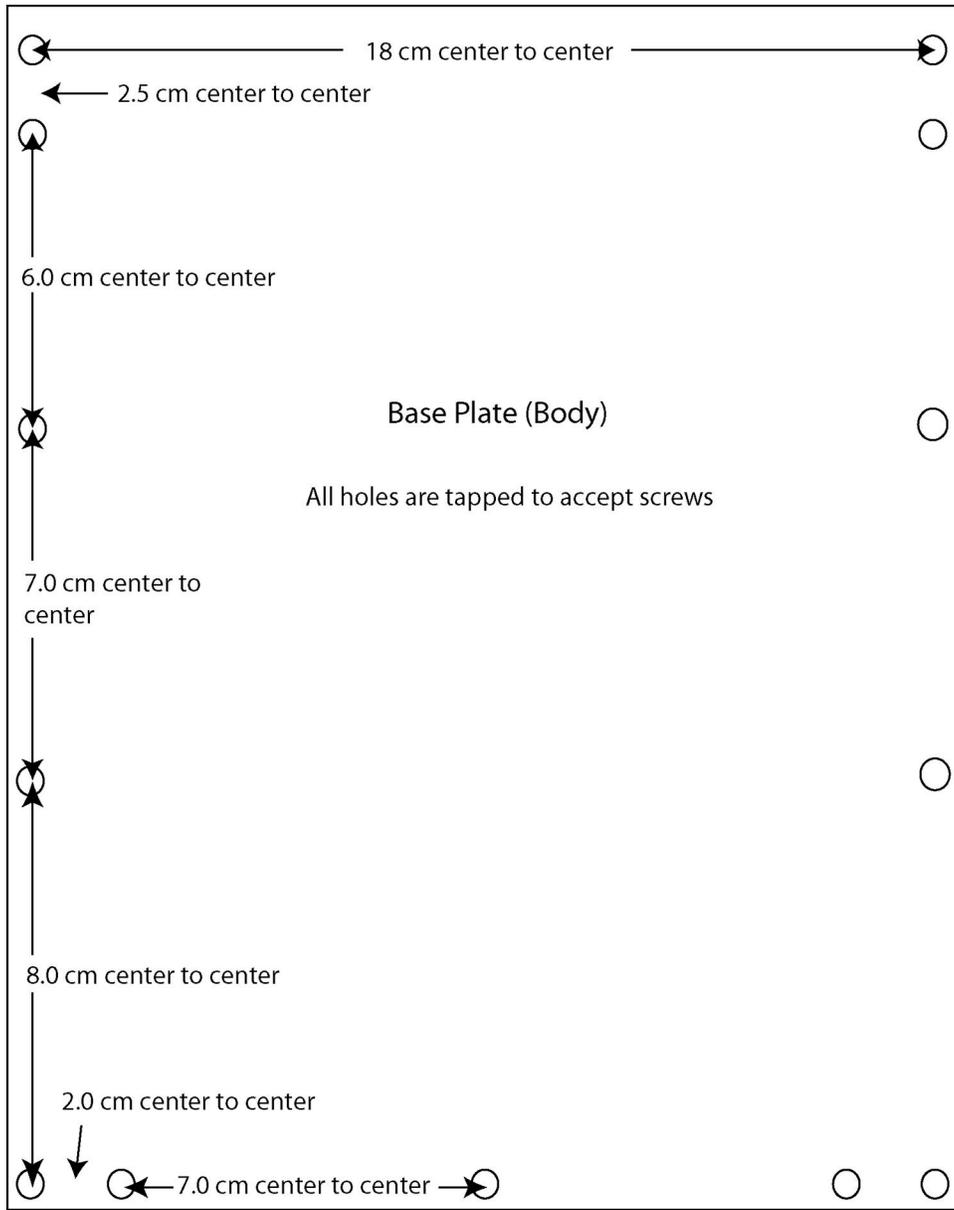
Base plate (body) of sampler showing the locations of holes drilled and tapped to accept screws for holding the framing.
